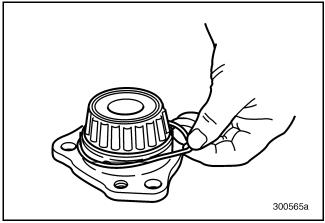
Removing O-Ring from Shoulder of Front Countershaft Front Bearing Cover
